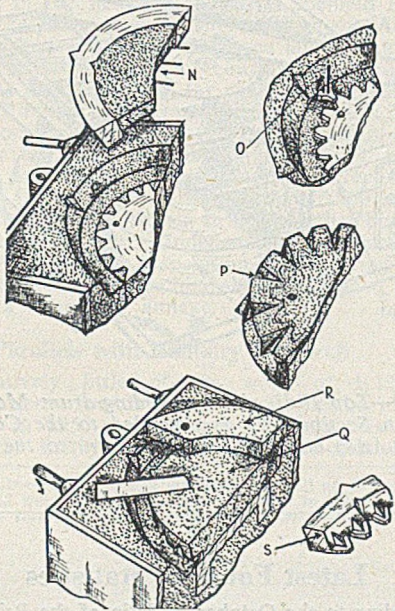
(N) Strip Ring separation from the Gear-wheel Part Mould; (O) shows the Former used for pressing down Sand between the Teeth; and (P) the filing of the Core. In the re-assembly of the Mould (Q) shows the Filed Core; (R) a flat-back Ring Core, and (S) a section of the Cast Stripping Ring.
